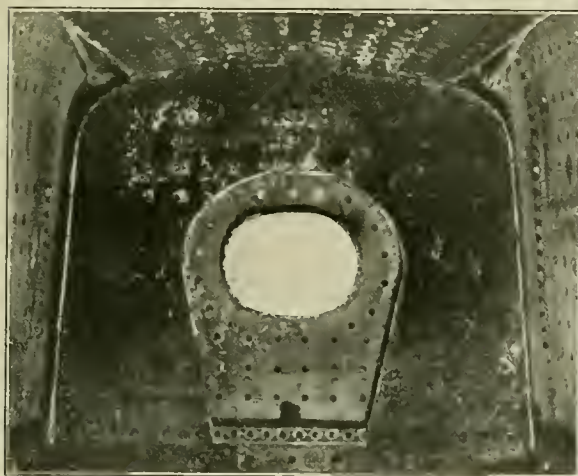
Firebox to Be Welded by Oxy-Acetylene
